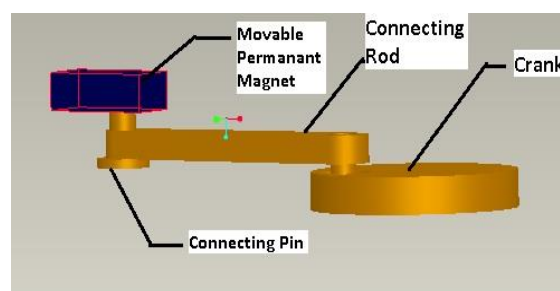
The crank mechanism comprising of a crank driven by a connected rod attached to a permanent magnet
